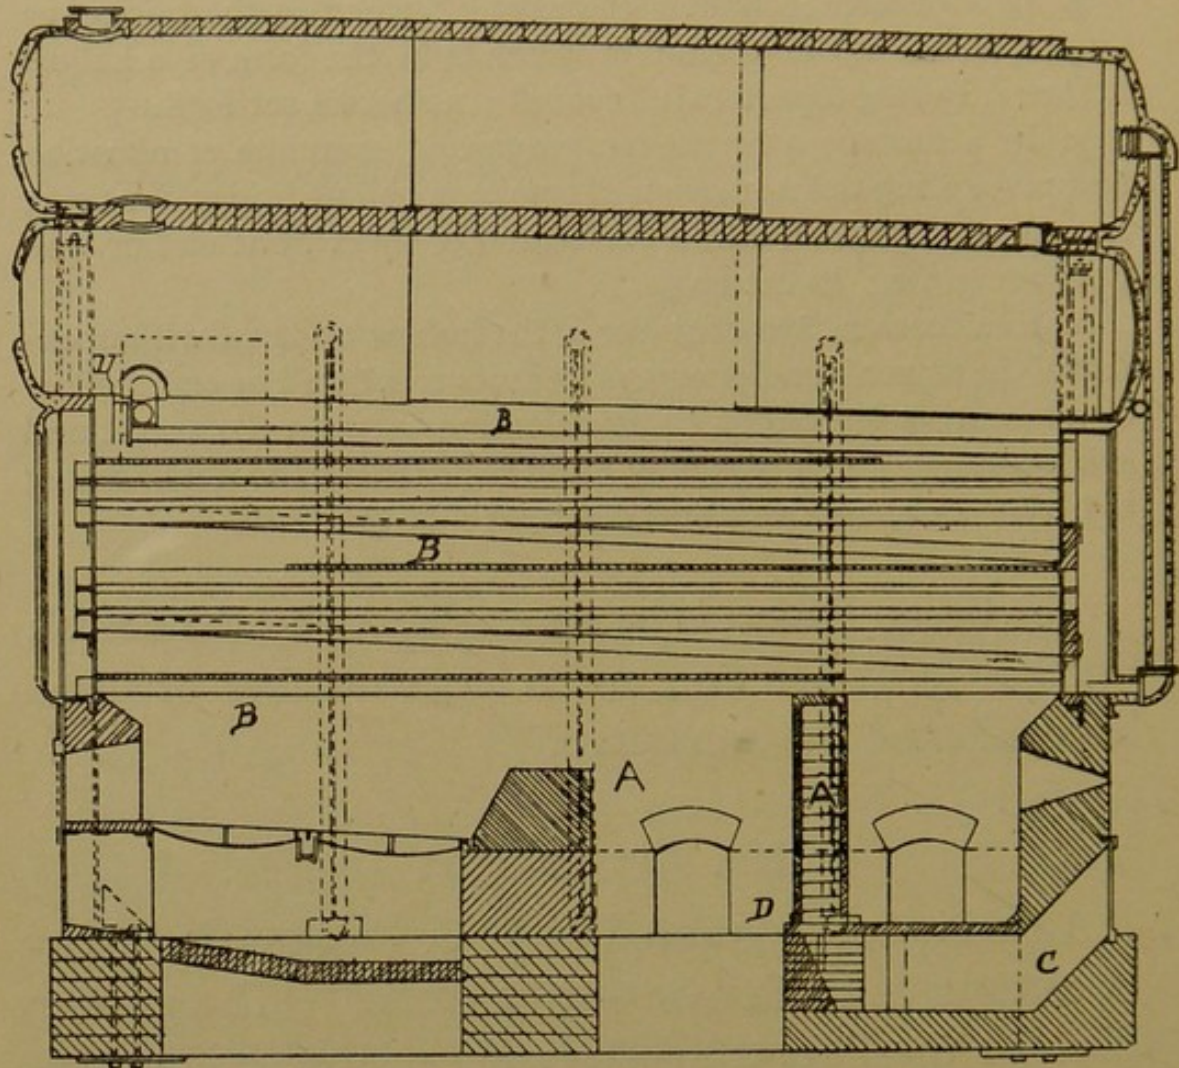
THE PARKER WATER-TUBE BOILER SETTING.
